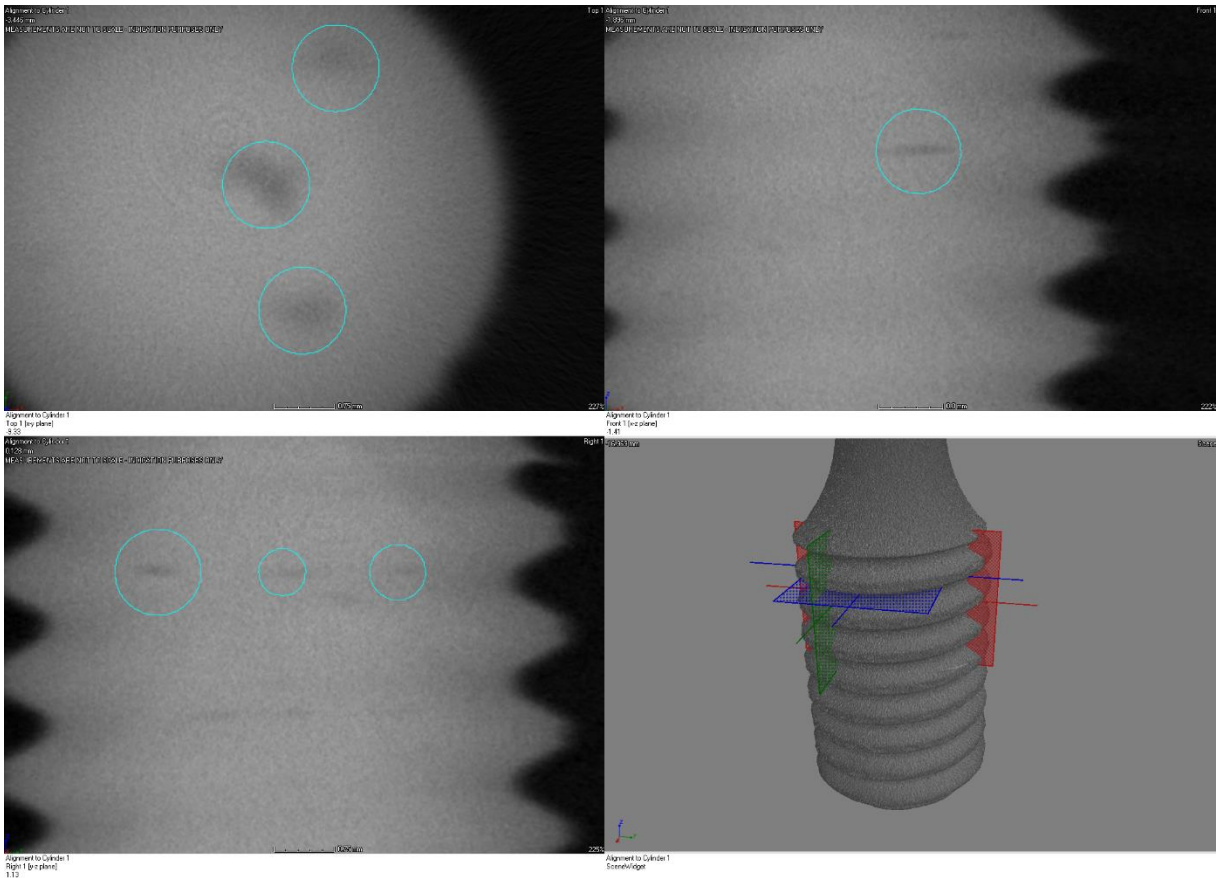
X-ray tomography of as-built PA samples manufactured using EBM indicating internal defects.
